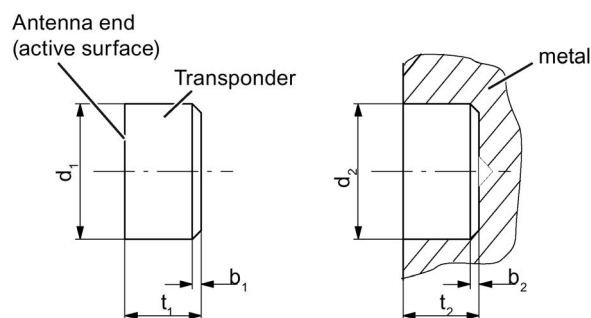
Flush-mounting of MDS D421/D521/E623 in metal with tools
